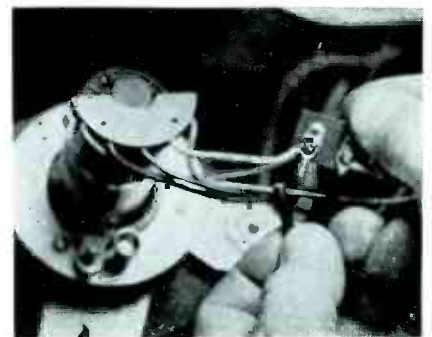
THE DISCONNECT PLUG as installed in the picture-tube socket leads.
